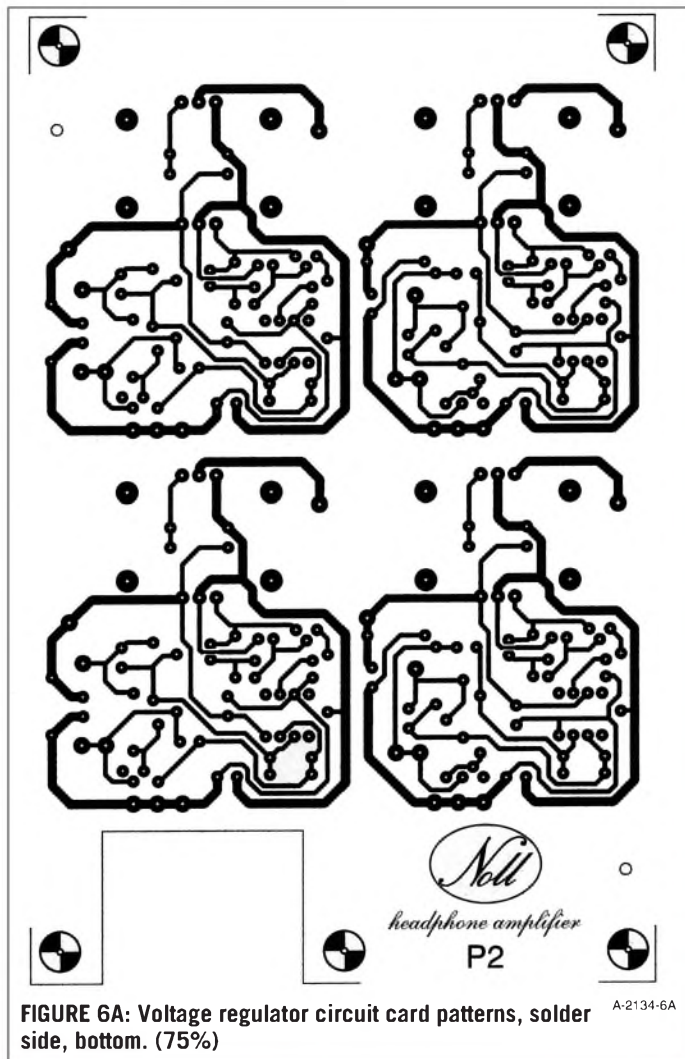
A: Voltage regulator circuit card patterns, solder side, bottom. (75%)
